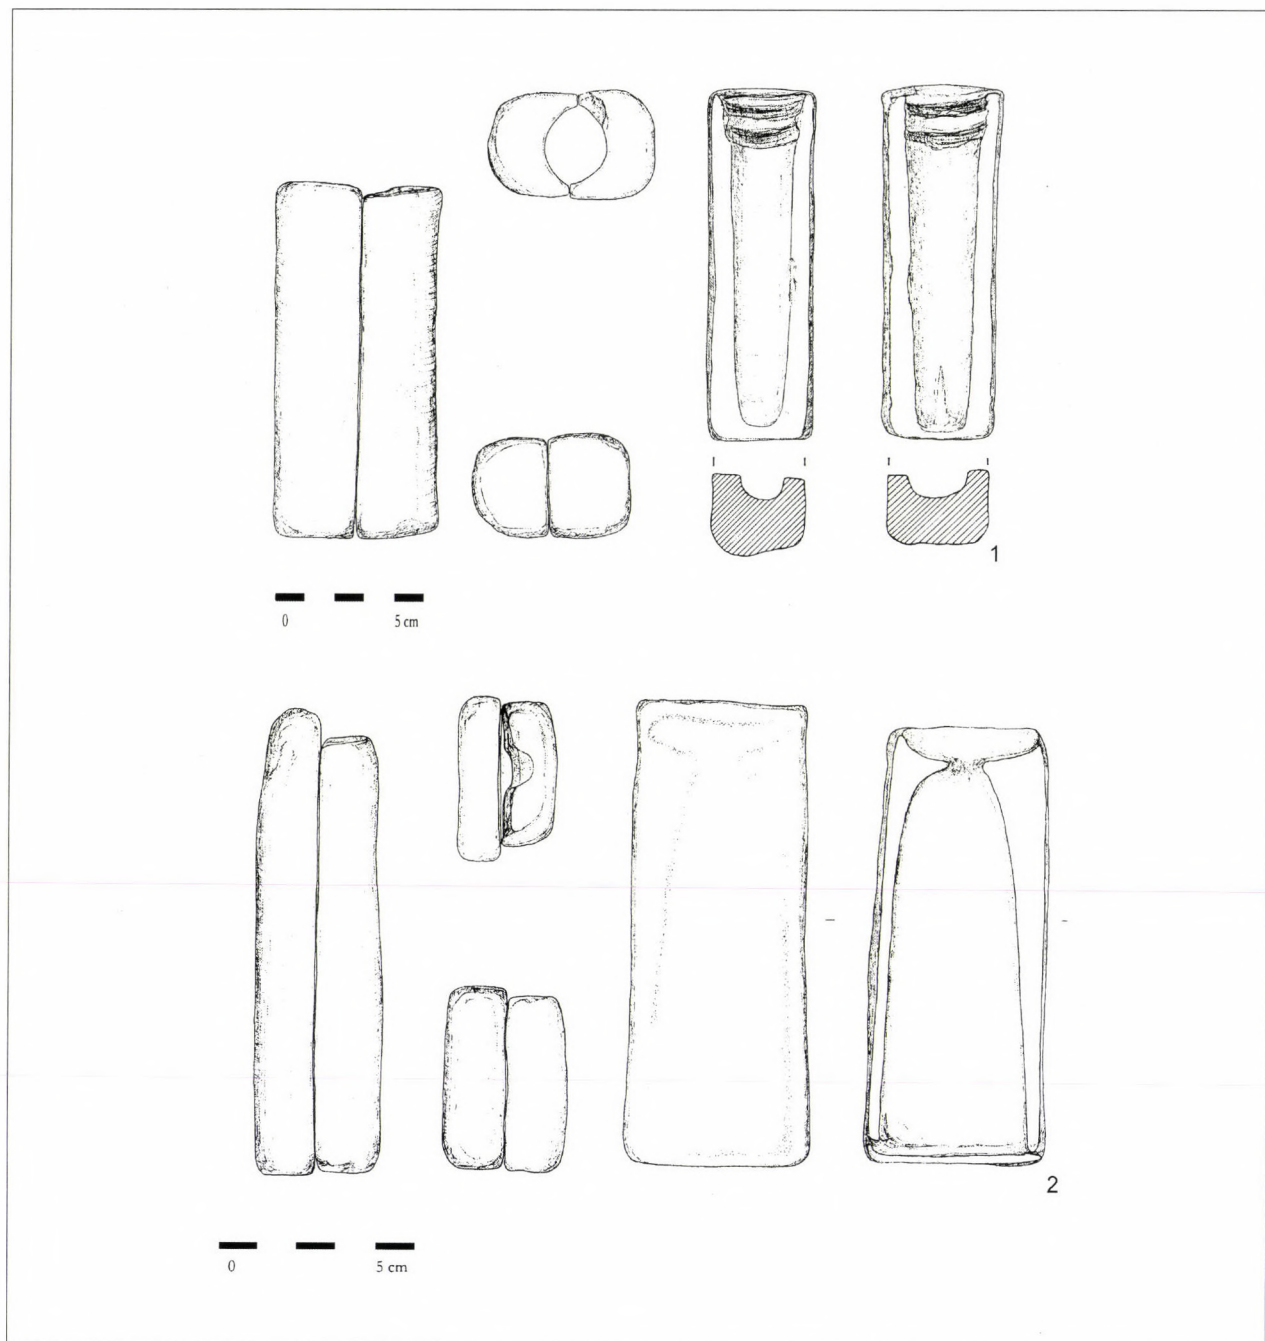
Üllő. 1: Mould 6; 2: Mould 7
